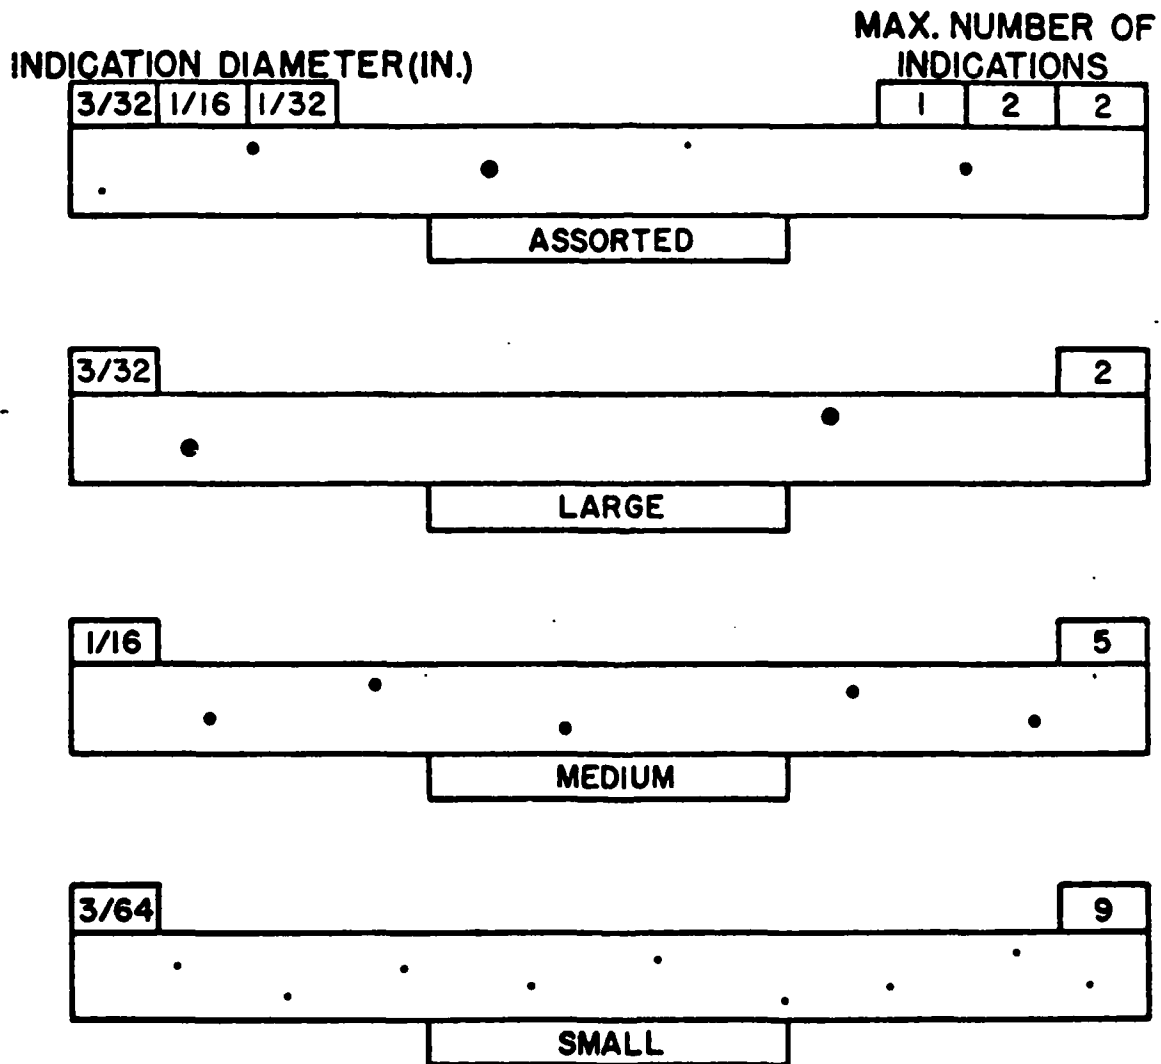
Class 2 Weld Surface Inspection Standards for Scattered Rounded or Non-Linear Indications (Sheet 3 of 6).
